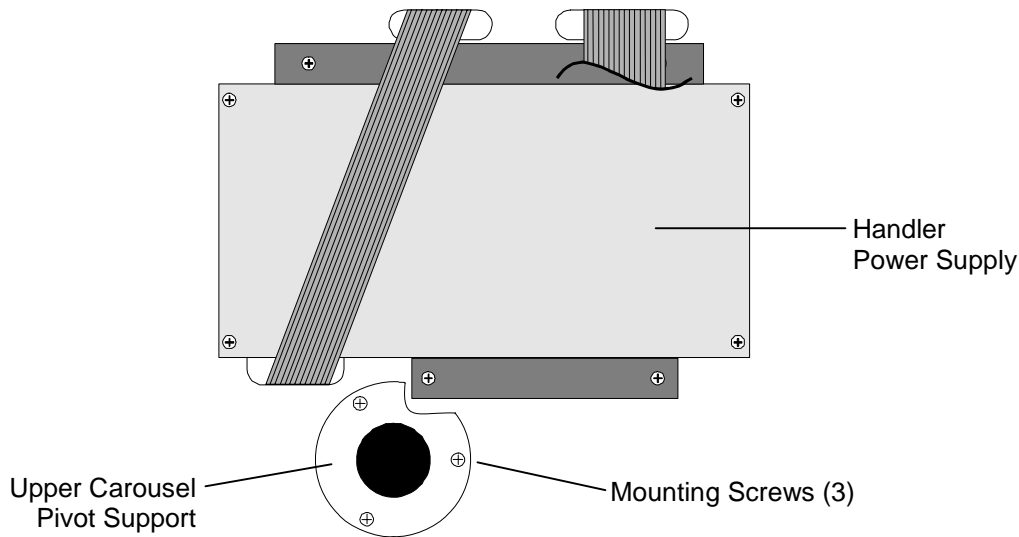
Single Bay TLS Top View – 62xx Shown
